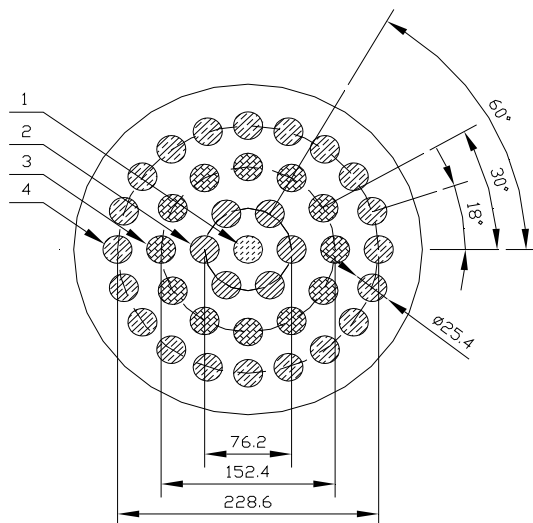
Schematic diagram of the arrangement of in the liquid collecting tubes: 1. Center section with 1 tube; 2. Inner section I with 6 tubes; 3. Inner section II with 12 tubes; and 4. Outer section with 20 tubes (dimension unit: mm)
